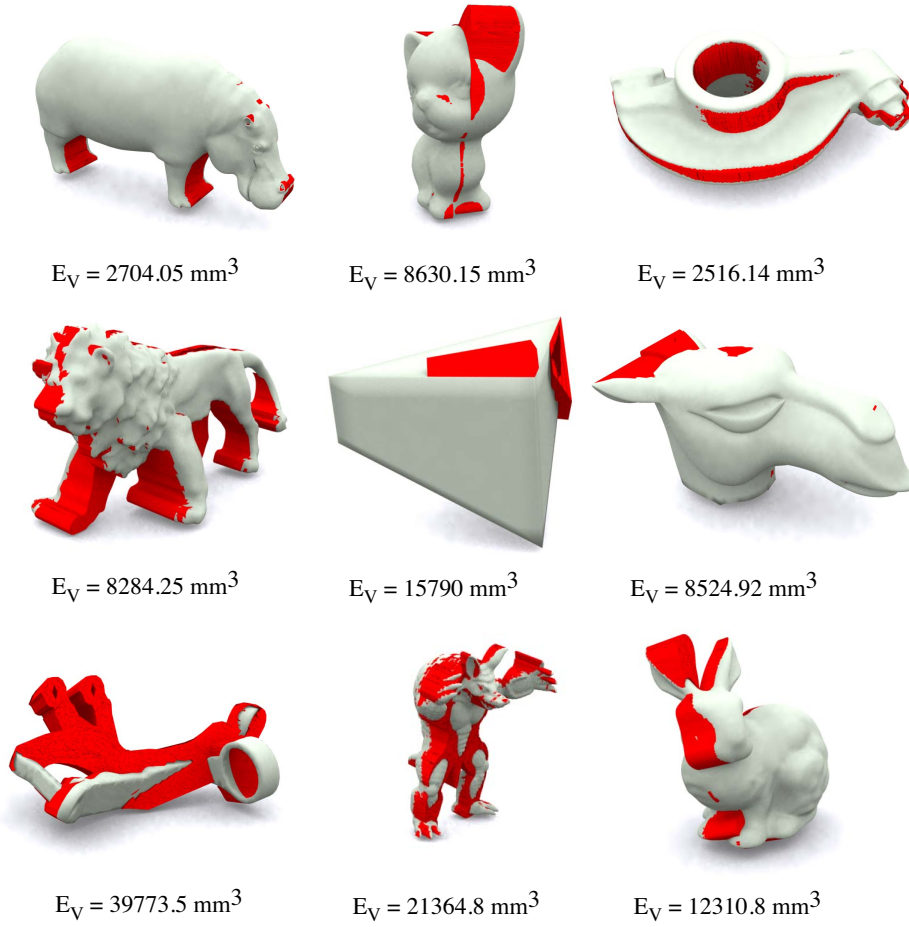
A set of results of our method. The regions in red show the fabrication error when splitting the input mesh, fabricating both parts using a CNC milling machine and assembling the two parts to the final approximated shape. Given is also the fabrication error for a 100mm sized object.
